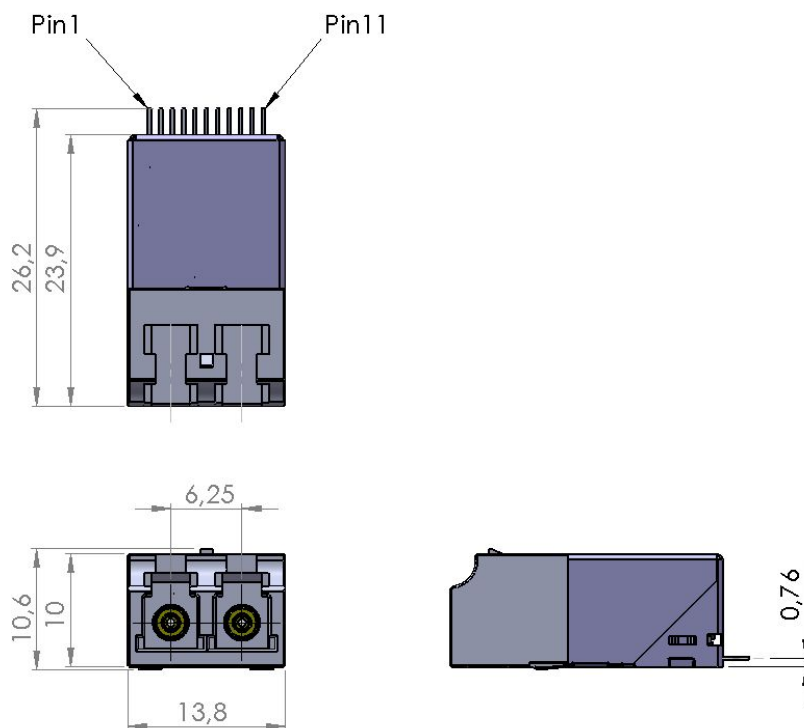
SCFF Module without the Cage (Dimensions in millimeters)
